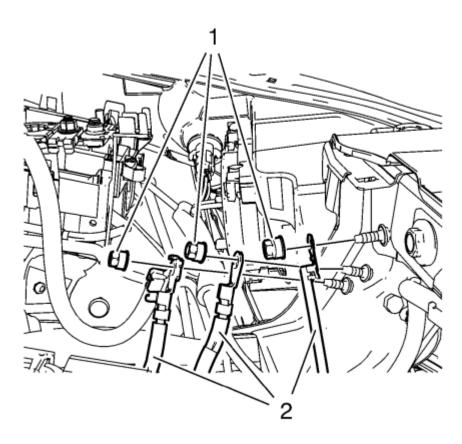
EVAP Canister Valve, Tube & MAP Sensor Courtesy of GENERAL MOTORS COMPANY
